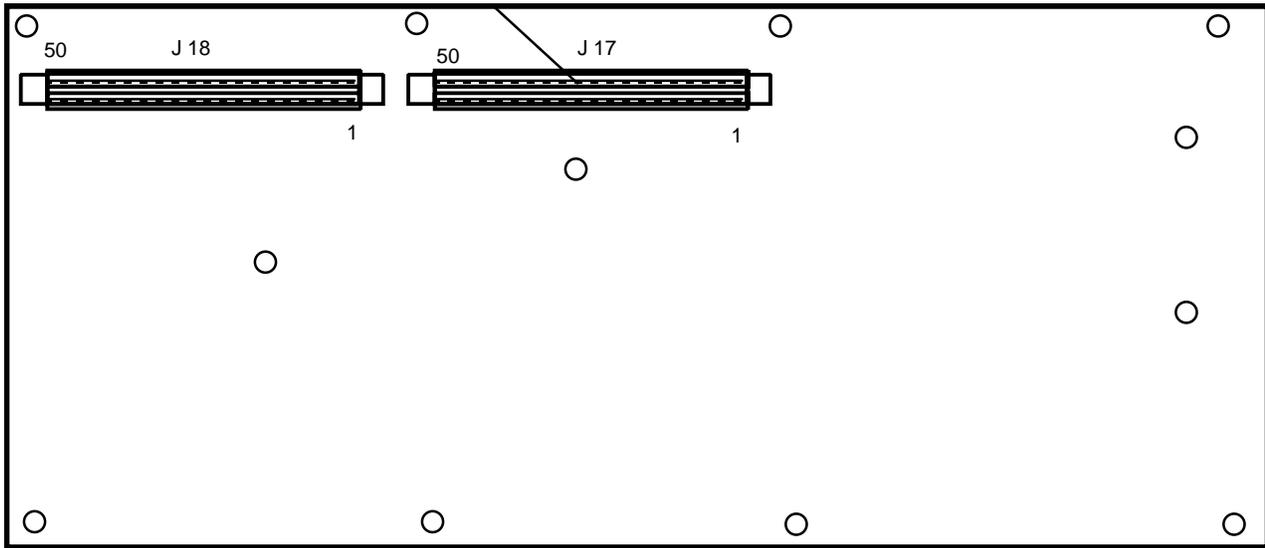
Main Shelf Backplane 50-Pin Ribbon Cable Connectors (Rear View)Figure 2-18 Expansion Shelf Backplane 50-Pin Ribbon Cable Connectors (Rear View)
